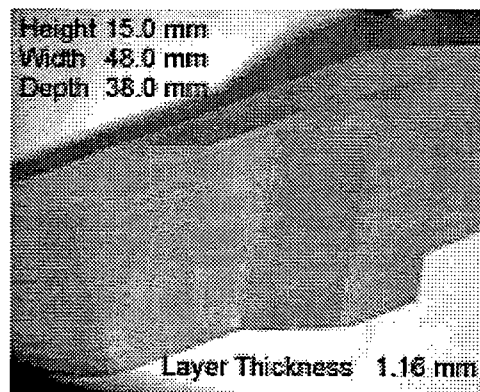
A part with layer having slanted side wall fabricated using a five-axis milling machine
